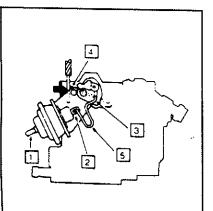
CHOKE ROD CAM ADJUSTMENT
